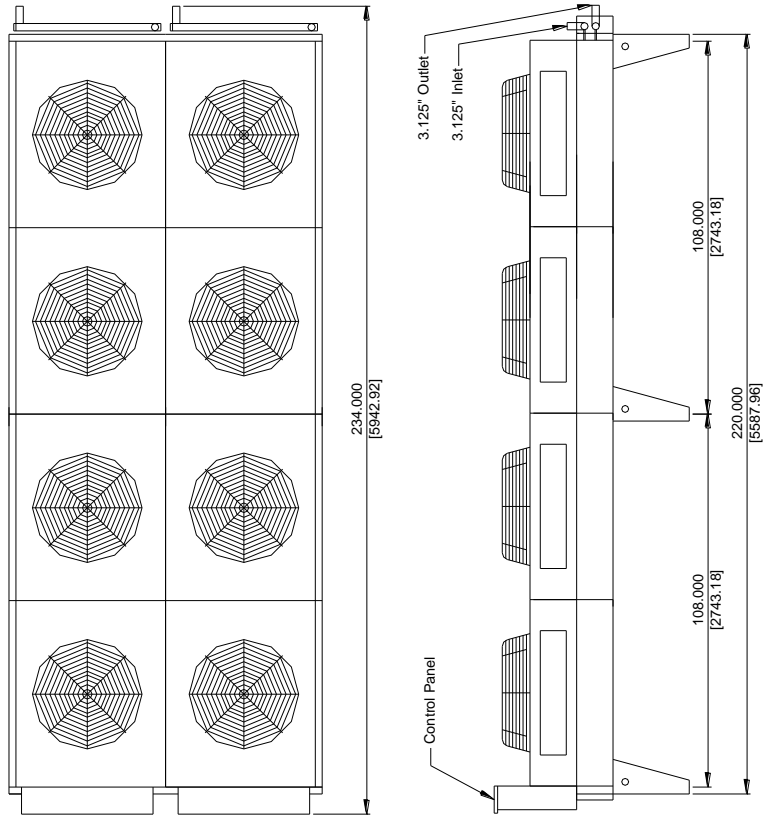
MXR100 Remote Condenser Model LAVF24410 Weight & Dimensions Drawing
